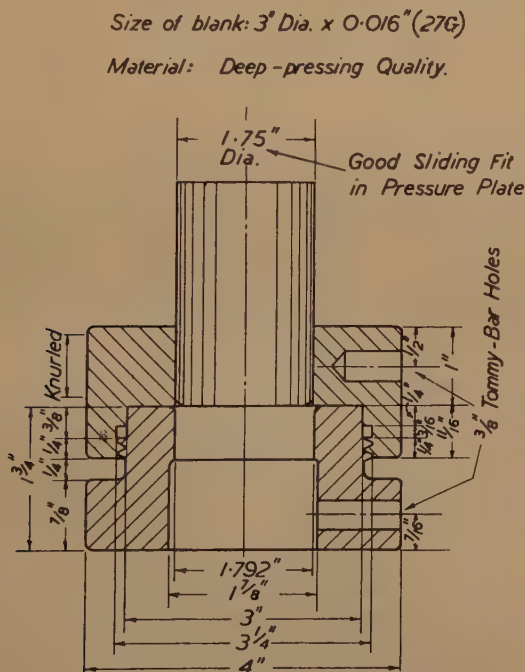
Sectional Diagram of Tool used for pressing the covering cap for the bomb mould.
